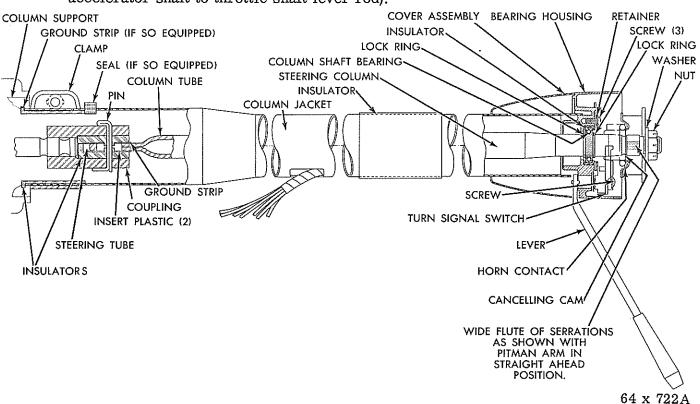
Steering Column Cross Section (Except adjustable steering wheel)
